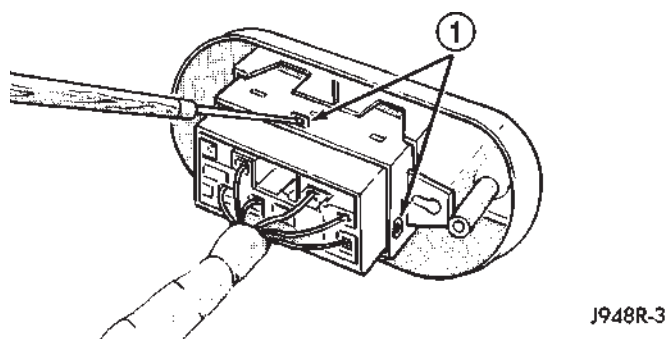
Power Seat Switch Connector Remove - Standard Cab
